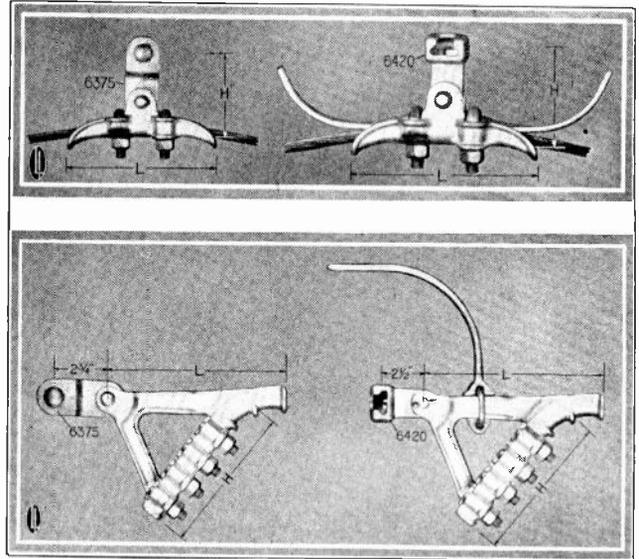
In the top view are shown two types of conductor clamps for use with suspension insulators. Below are shown strain clamps for dead ending conductor spans. Courtesy Lapp Insulator Co., Inc.
